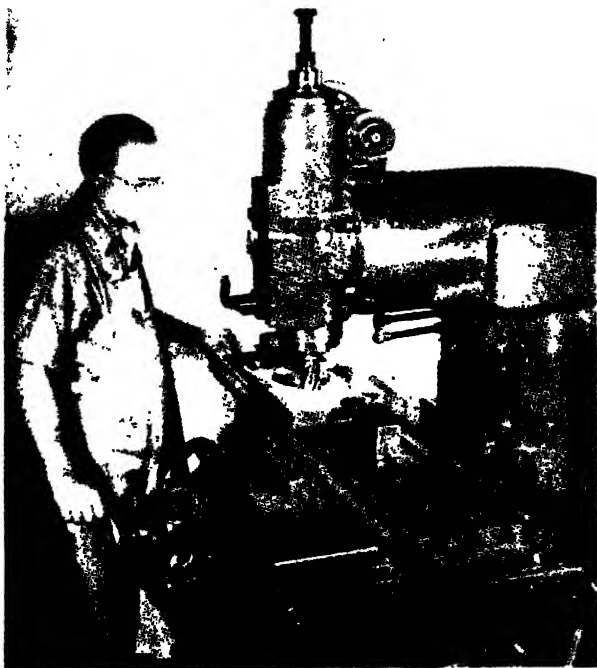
Milling an irregular outline in the vertical miller. (*The Brown & Sharpe Manufacturing Company*)
